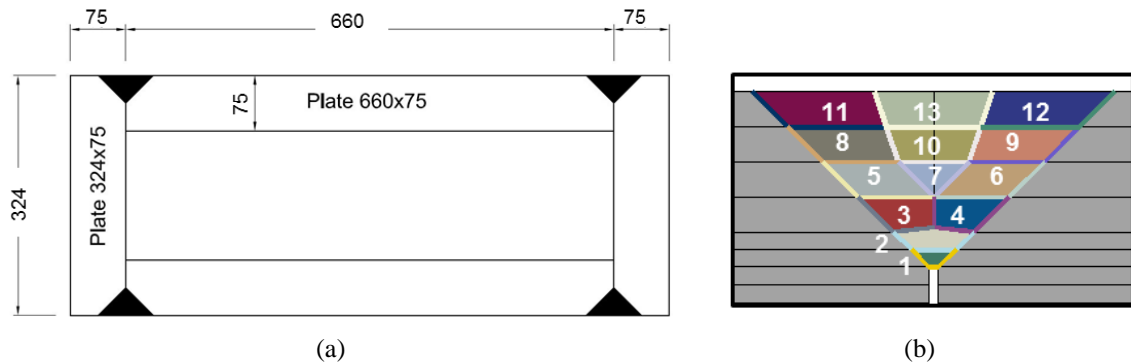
Case-study-1 a) dimensions (mm) of the built-up box section. b) The weld passes profile at each corner
